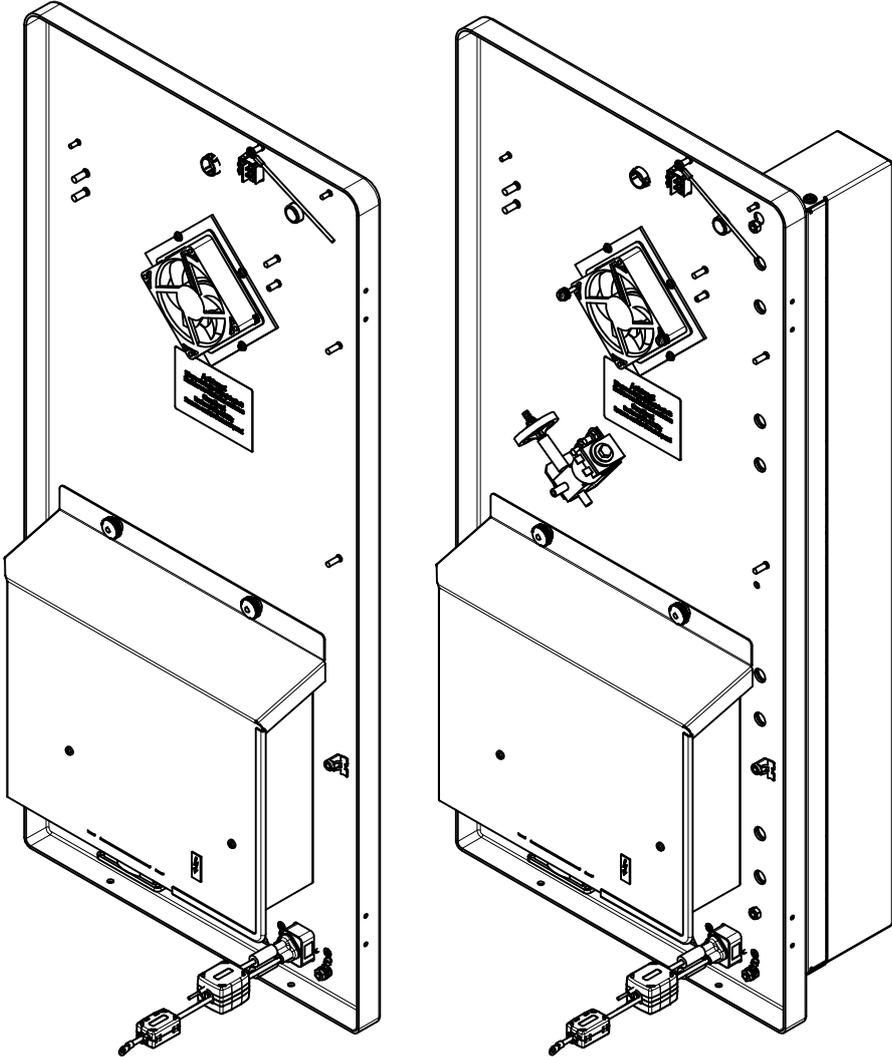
Rear Door Standard Machine (left) and HDF-Online (right)
